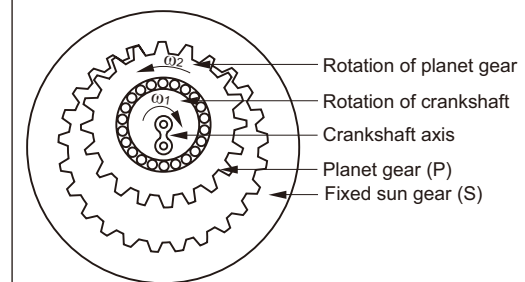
Epitrochoid Planet Gear-Circular (PIN) Tooth Sun Gear Combination
